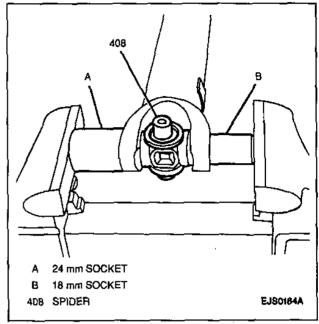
Pressing Propeller Shaft Yoke Bearing Caps
